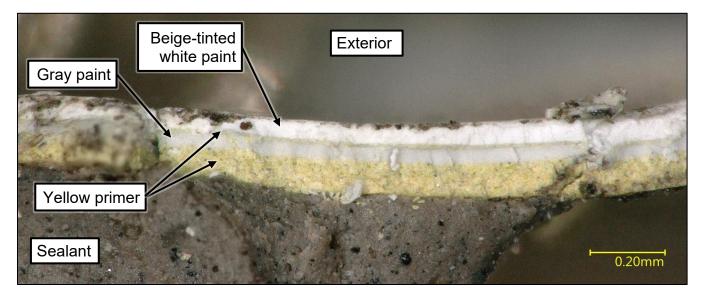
Sealant, primer, and paint layers on a sample cut from the joint between the output quill sleeve and the gearbox case on the 90° gearbox assembly.
